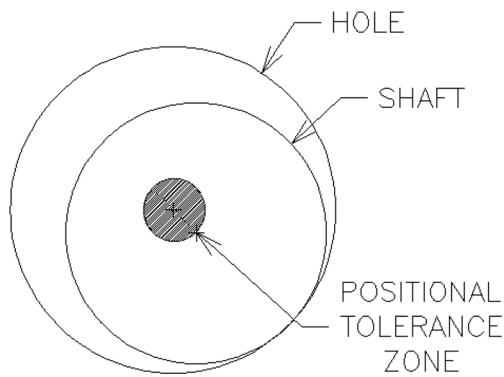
Positional tolerance zone for ideal geometry [36]
